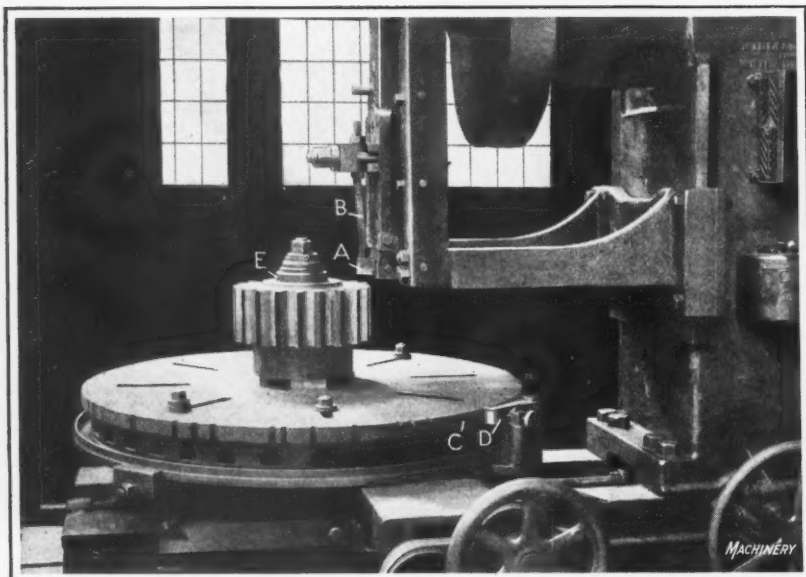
Slotter equipped for cutting Teeth of Pinions
